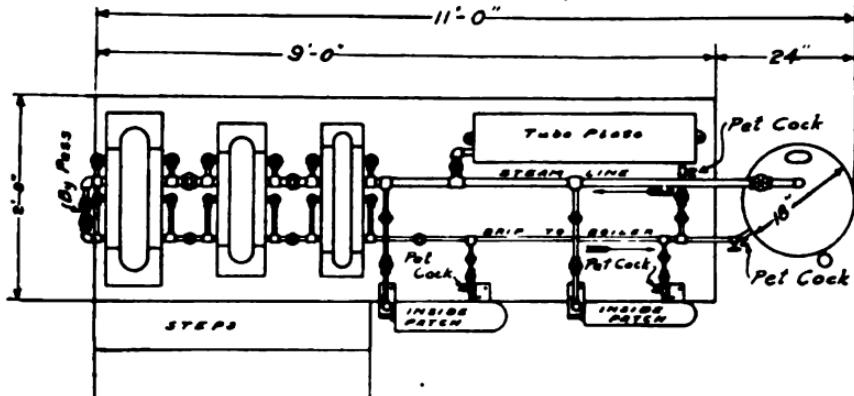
Plan View of Gravity-Return Vulcanizing Plant
